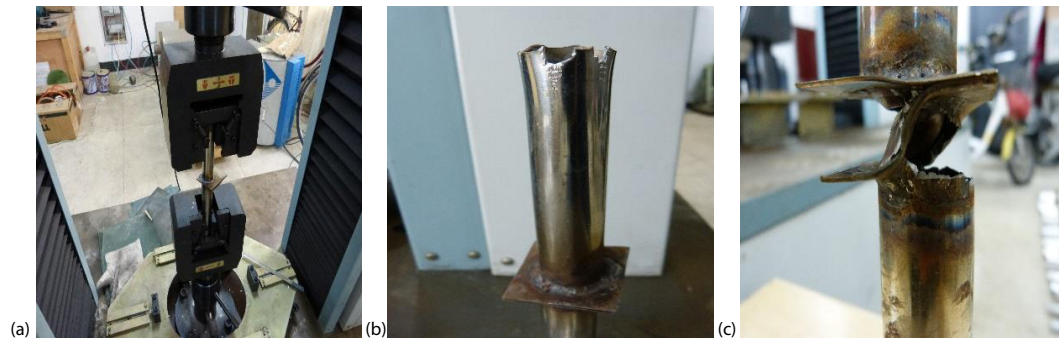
Experiment on mechanical strength of welding; (a) mechanical strength test diagram of weld, (b) weld sample diagram, and (c) weld test result diagram
